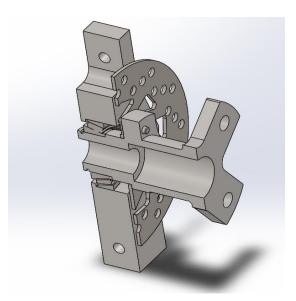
Sectional View of Rear Wheel Assembly (CAD)
